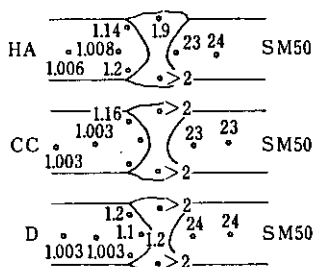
Magnetic permeability on weld joints of high manganese steels
